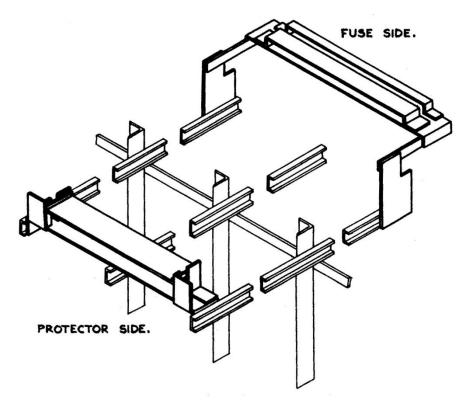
FITTING BRACKETS FOR TEST JACK FIELD.
